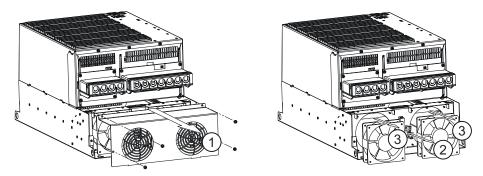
Cooling fan removal FSF (45 kW ... 110 kW)
